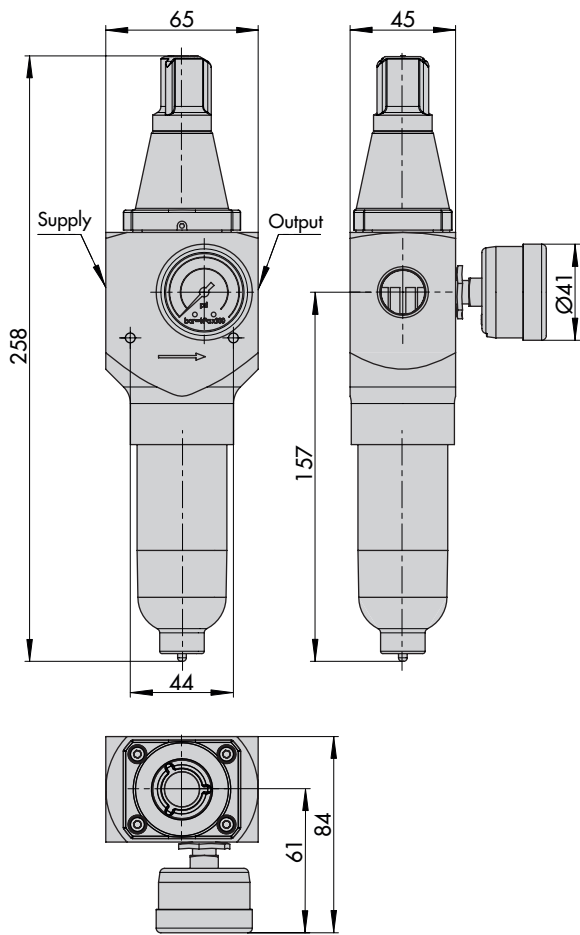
Type 4708-45 Supply Pressure Regulator aluminum version
